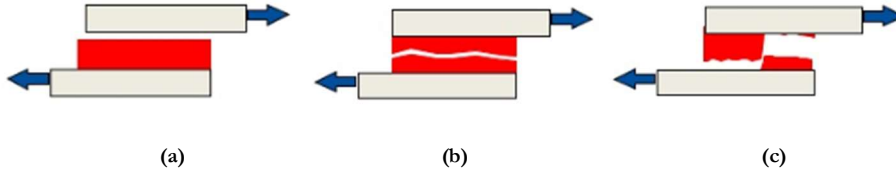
Failure type: (a) adhesive failure; (b) cohesive failure; (c) mixed failure.
